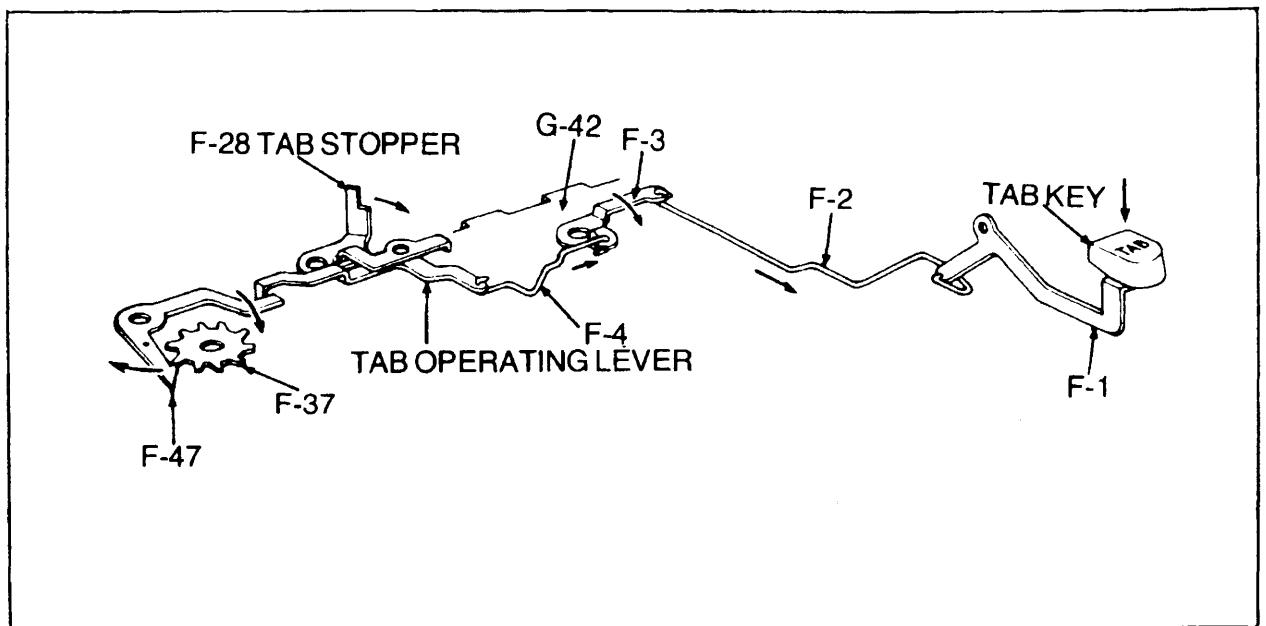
It may be a little difficult to orient this tabulator mechanism to one in a machine, since only the essential parts are shown. However, a tab mechanism is fairly easily examined in the machine (courtesy of Brother International Corporation).
